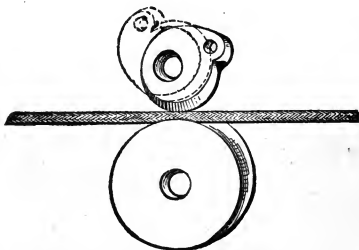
,545.—Trill cord carrier pulley and detent. The pulley is mounted on a hollow swivel post, by which the cord may be made to lead from the indicator in any direction. For indicating short stroke engines where the upper wheels of the reducing motion are used, the guide pulley is adjusted as shown in fig. 2,534. For longer strokes using the lower hole, it is projected below to lead to the larger wheel as shown in fig. 2,540. The purpose of the eccentric disc cord clamp is to secure the cord when wishing to remove the hook from the cross head. When the eccentric cam is thrown down into the position shown, the cord is free to draw out, without jerk on the instrument, but as the cord is held taut and cannot return, the hook drops off. Also when removing the instrument from the engine, it holds the cord under sufficient tension to keep it in place.
